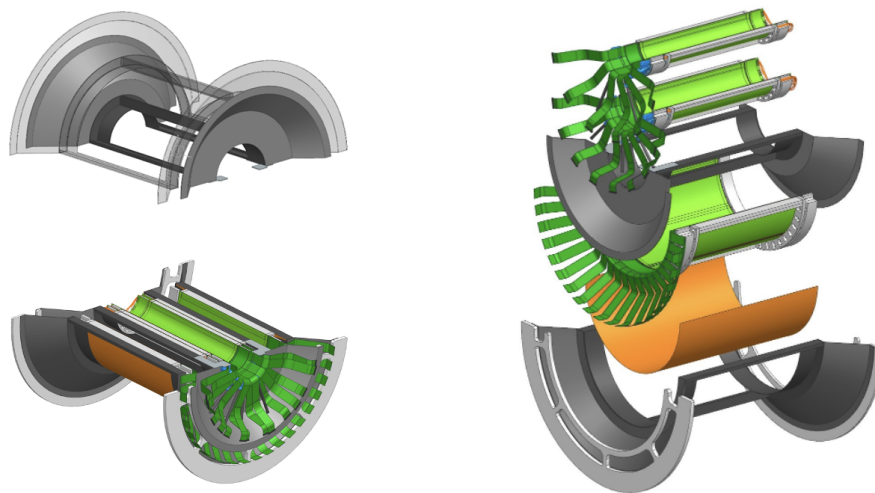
Top left: CAD representation of the frame supporting the IB. Bottom left: IB half-barrel CAD view with sensors and cable routing. Right: Exploded CAD view of IB from the h-side and the e-side. The orange element is the kapton shield. In blue the air conveyors are shown.
